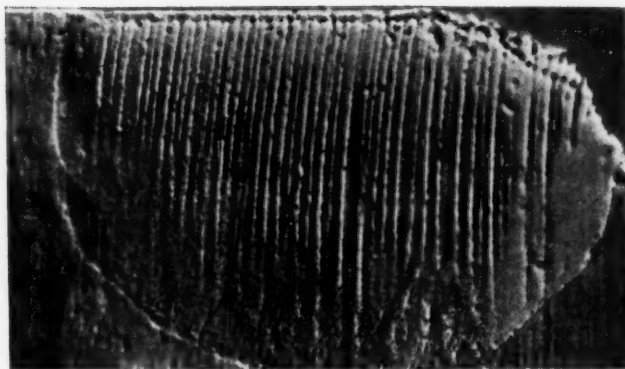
CUTTING EDGE AND CHIPS FORMED AT 2650 FPM
